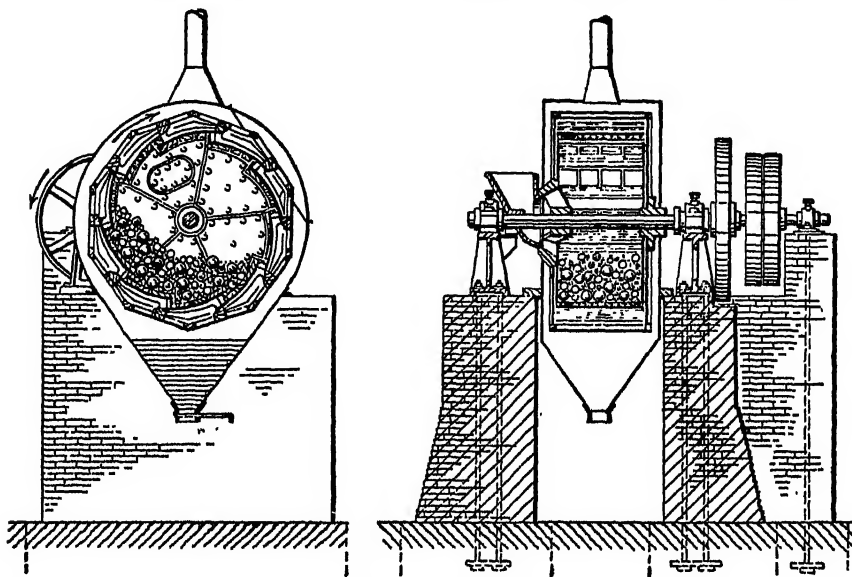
TRANSVERSE AND LONGITUDINAL SECTIONS OF BALL MILL FOR FINE GRINDING.
